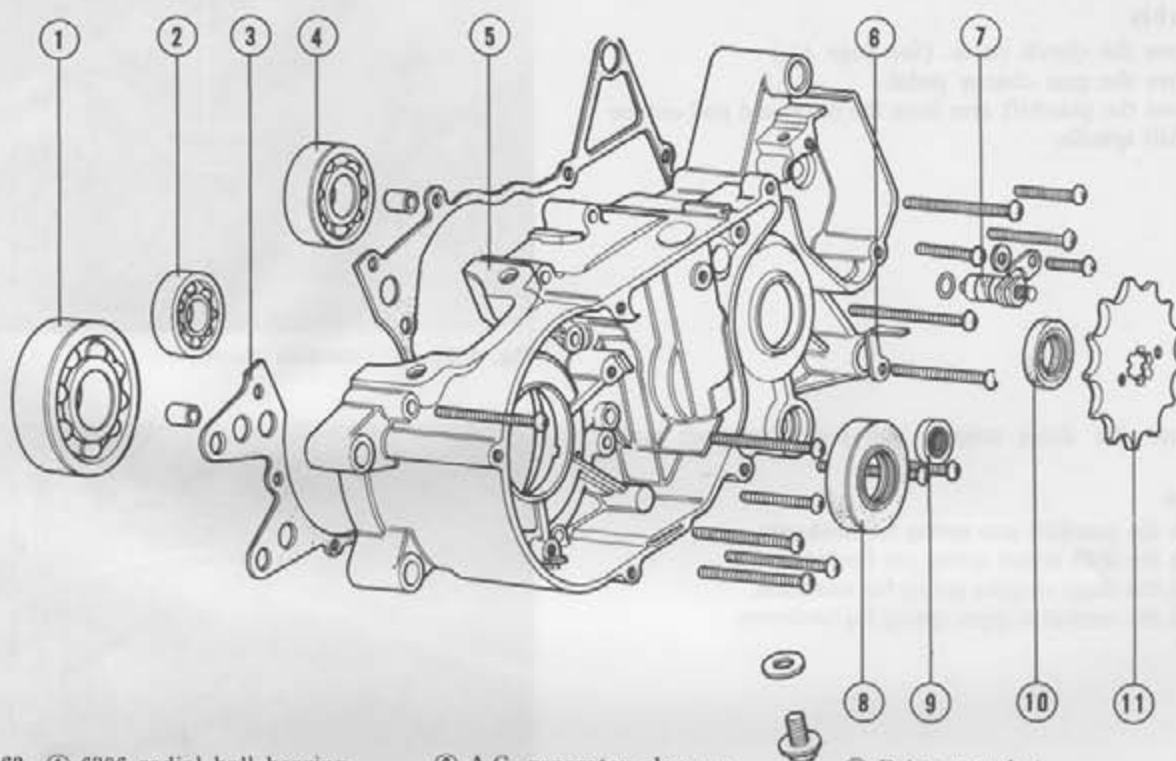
① 6306 radial ball bearing ⑥ A.C. generator clamper
